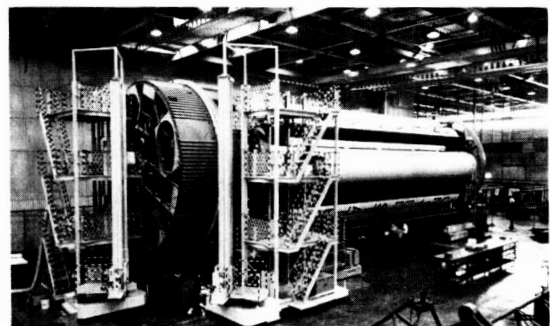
FABRICATION AND ASSEMBLY OF S-I-8 AT MICHOU D
